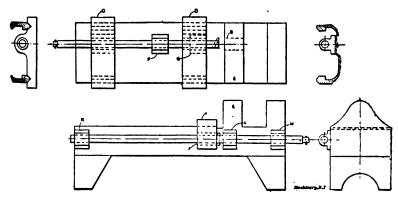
Examples of Boring where Parts of the Machine being Built are Used as Guiding Means
